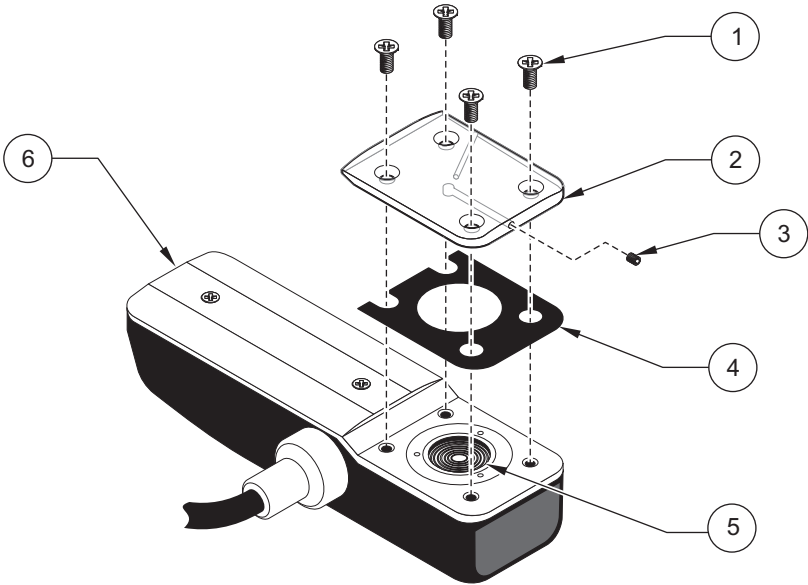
Removing the Protective Cover (Oil-filled Sensor)
